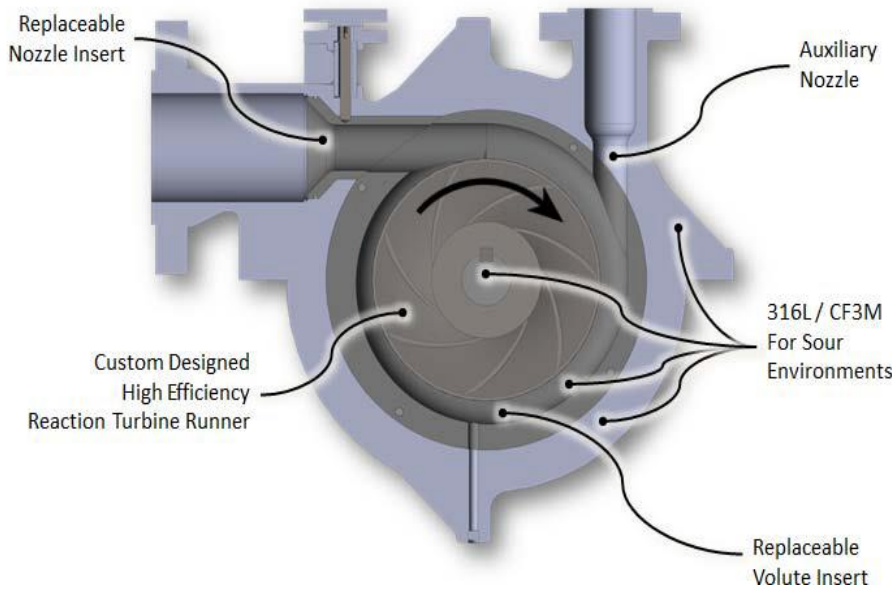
Hydraulic turbocharger, typical turbine cross section showing auxiliary nozzle
